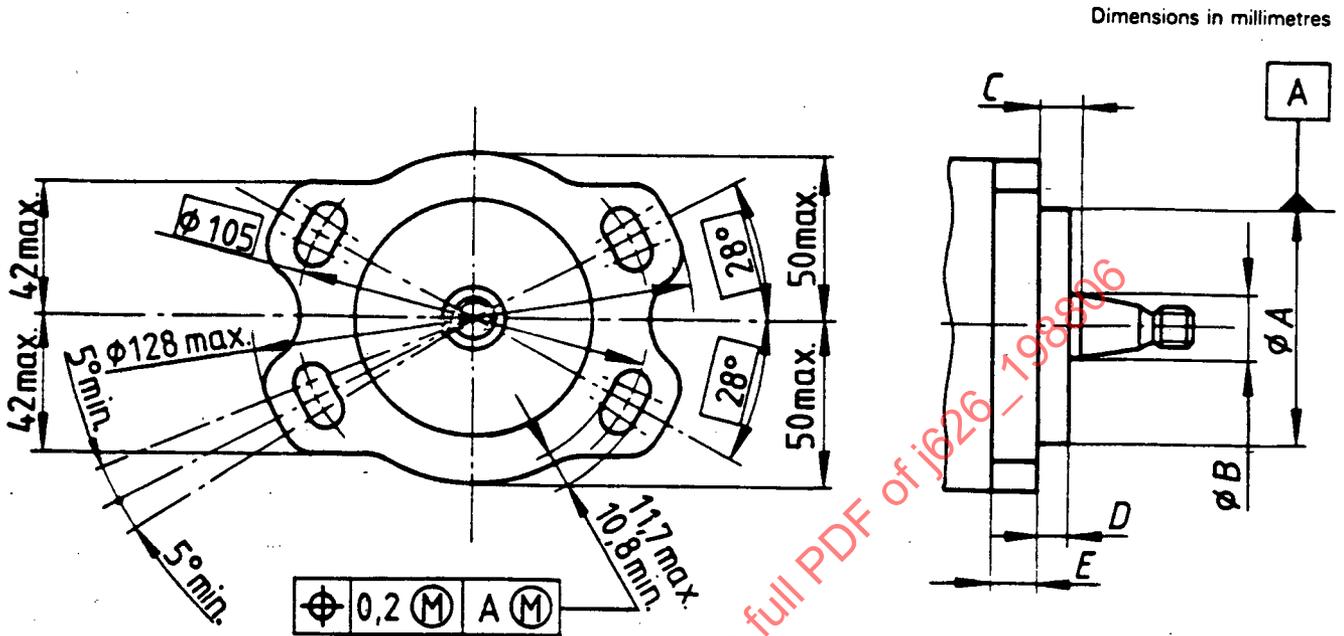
Fuel Injection Pumps - Type 3 End-Mounting Flange
